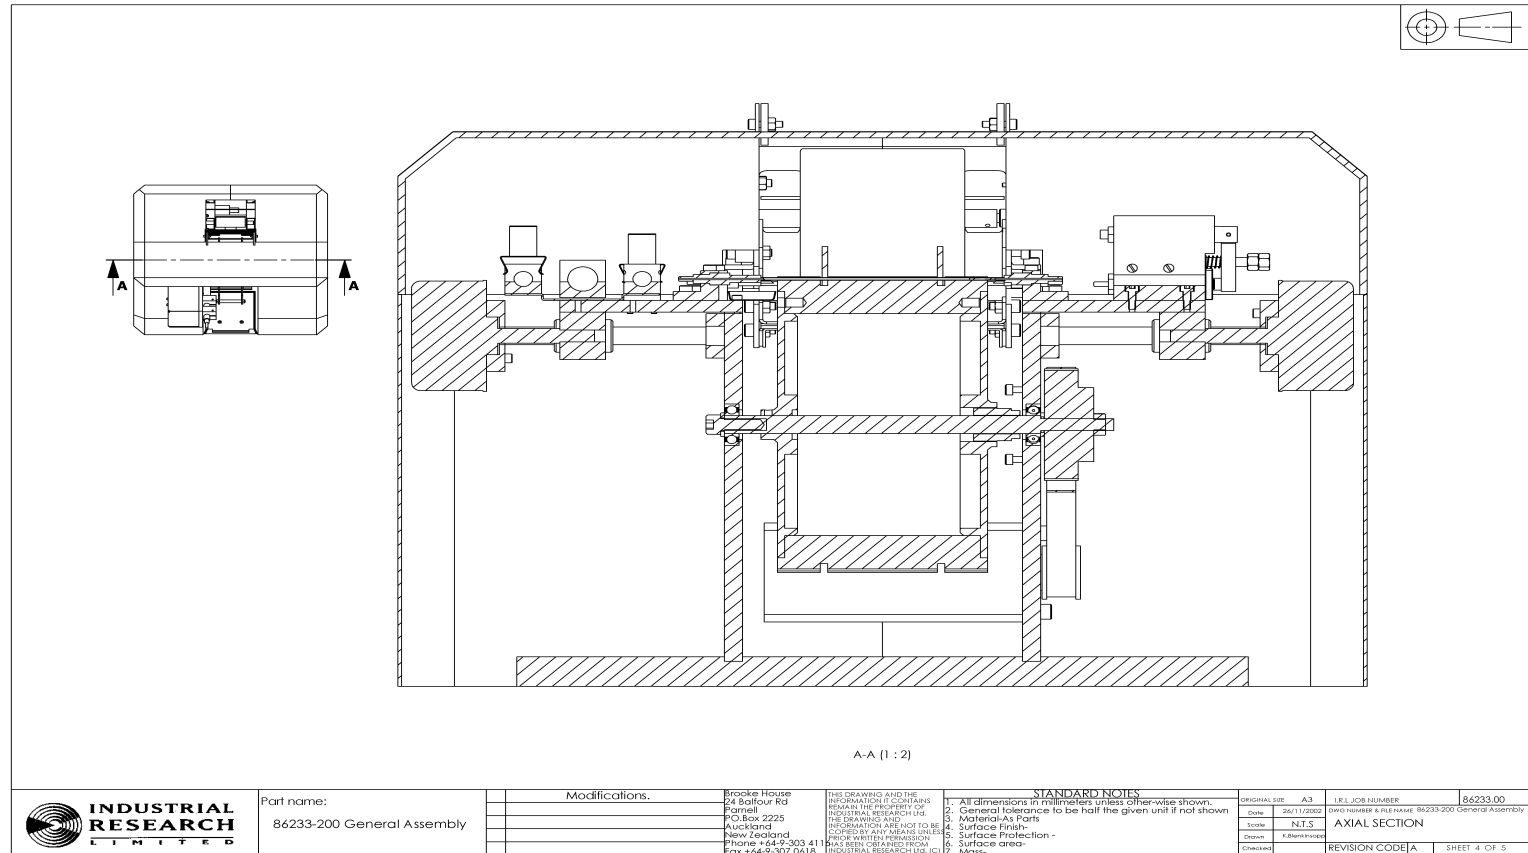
KNEX machine, general assembly cross-sectional view through drum.
